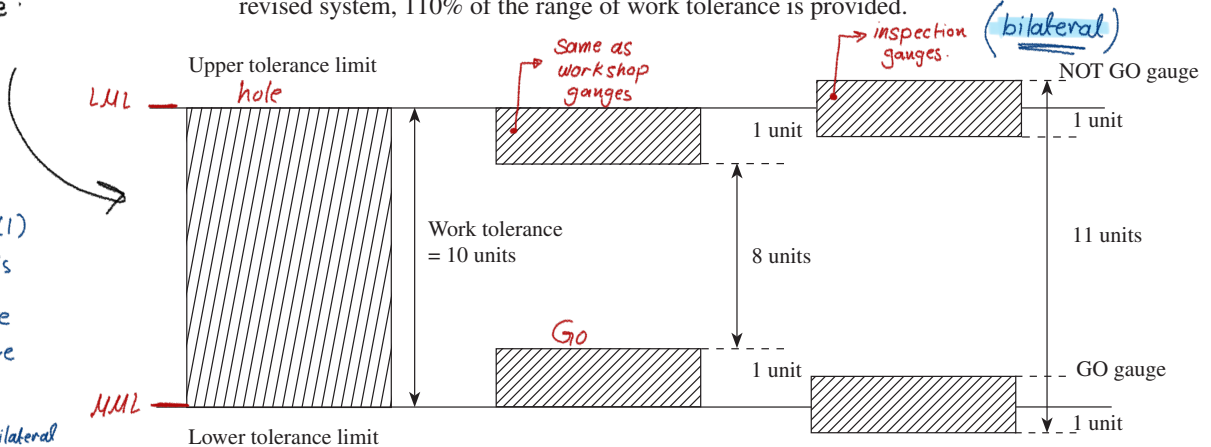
Disposition of modified tolerances on workshop and inspection gauges
